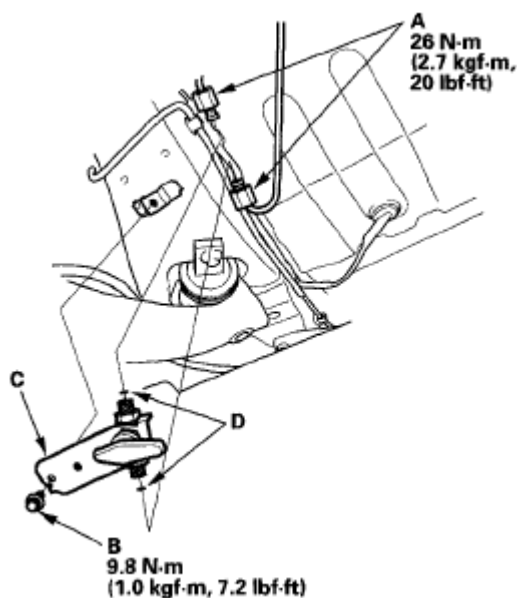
Identifying Manual Shut-Off Valve, Fuel Lines, O-Rings With Torque Specifications
